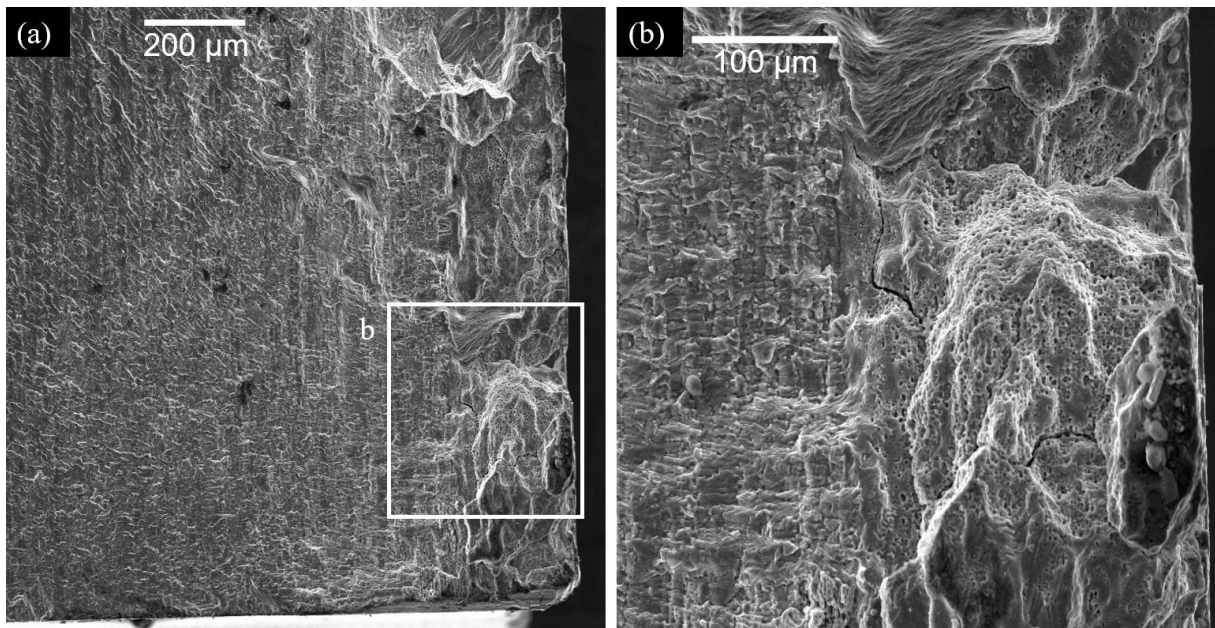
Fracture surface of as extruded specimen with 24 h pre-corrosion.
